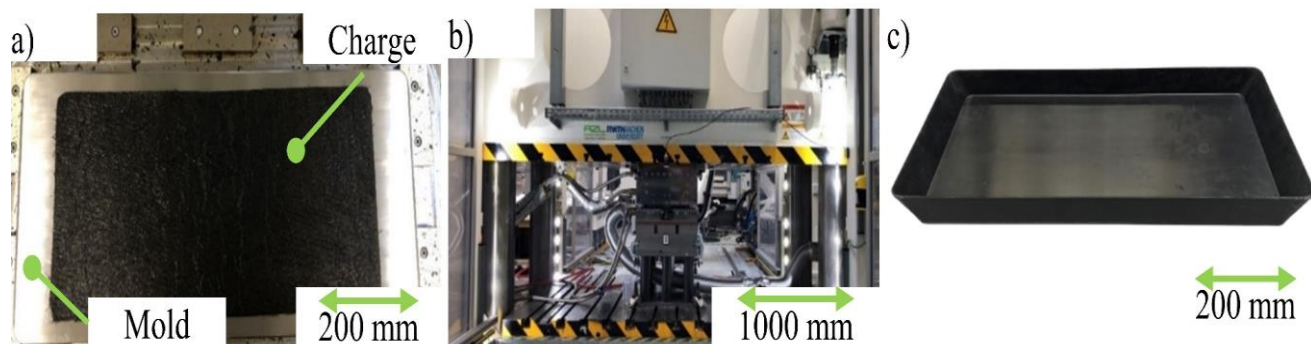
SMC charge on the mold (a), compression molding with a commercial, industrial hydraulic 18,000 kN press (b), the final SMC part (c).
